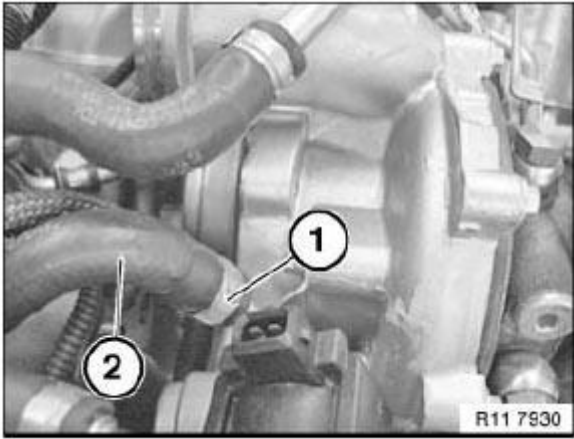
Identifying Coolant Feed Line And Hose Clip
